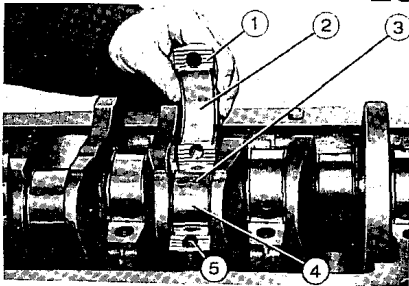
Detail of the wording hobbled on the big end bearings.
